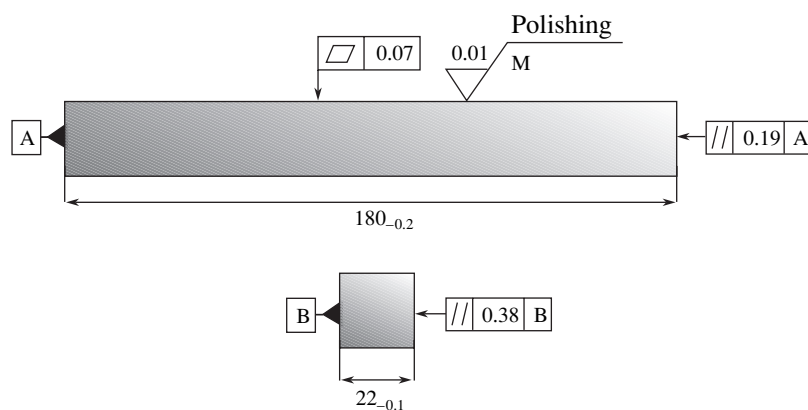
Specification for the geometrical dimensions and surface finish of scintillators.
